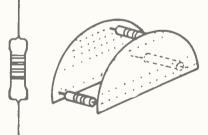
Cut the resistor leads as shown at left and then solder three resistors to two half-discs as shown to make a rigid assembly.
